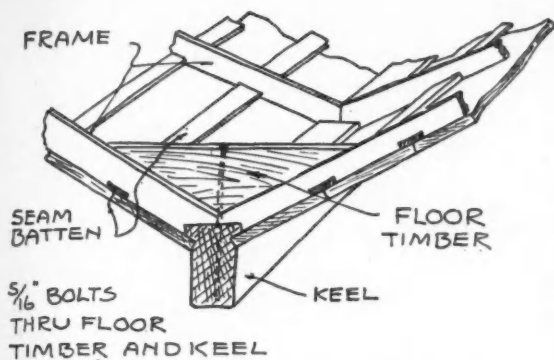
A section through the keel showing floor timbers, battens and fastenings.
